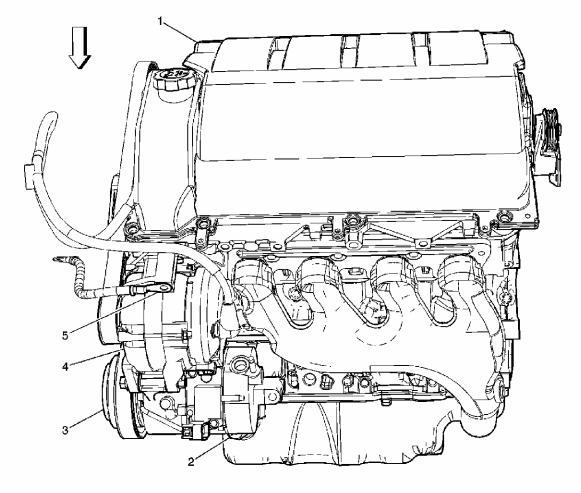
View Of Left Side Of Engine (4.6L) Courtesy of GENERAL MOTORS CORP.
